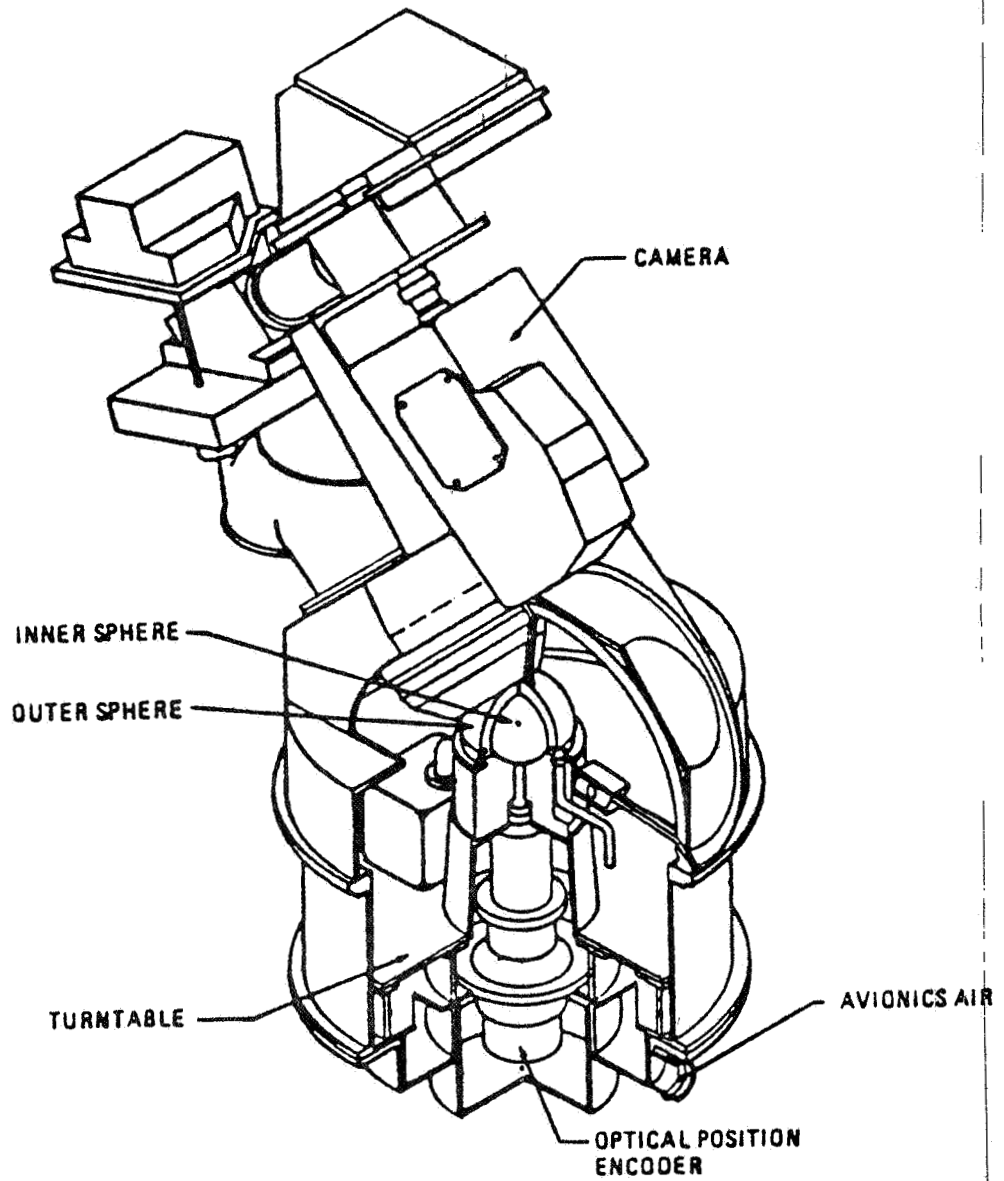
GFFC MECHANICAL ASSEMBLY (ISOMETRIC VIEW)
